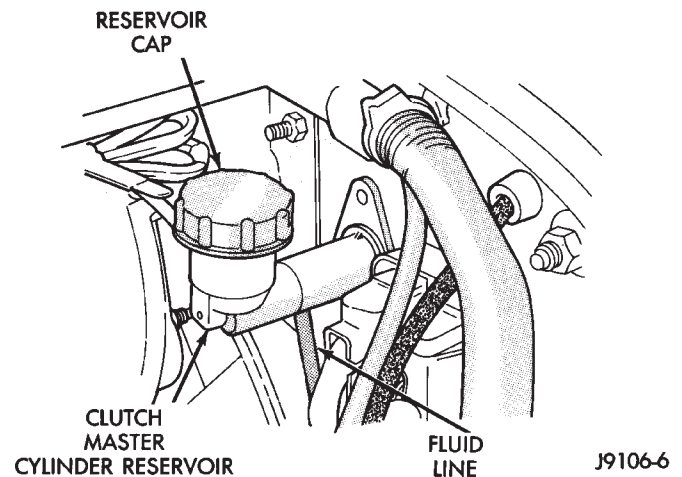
Hydraulic Clutch Master Cylinder Fluid Reservoir
